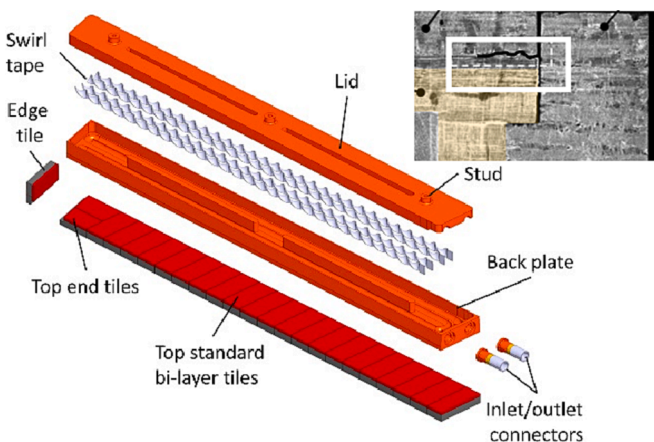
Exploded view of a TE (left) [3] and delamination crack at the CFC-Cu interface of the top end tile (right) [8].
